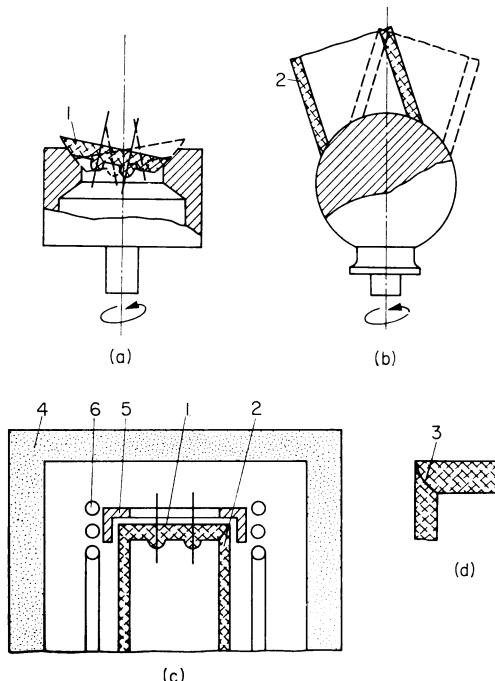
Diffusion seal: (a) polishing the edge of the disc; (b) polishing the edge of the tube; (c) the sealing process; (d) the sealed edge. (1) disc; (2) tube; (3) optically polished contact edges; (4) electric furnace ($200\text{--}400\text{ }^{\circ}\text{C}$); (5) graphite ring for local heating; (6) high frequency induction coil. After Bleuze¹³⁸ (Courtesy of Société Française des Ingénieurs et Techniciens du Vide)
